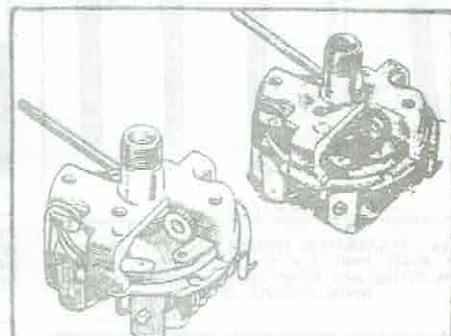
EXCESSIVE LUBRICATION. Avoid excessive lubrication. If oil appears in the flexible drive, suspect faulty oil-seal at point of drive. This illustration shows oiled-up speedometer movement.
